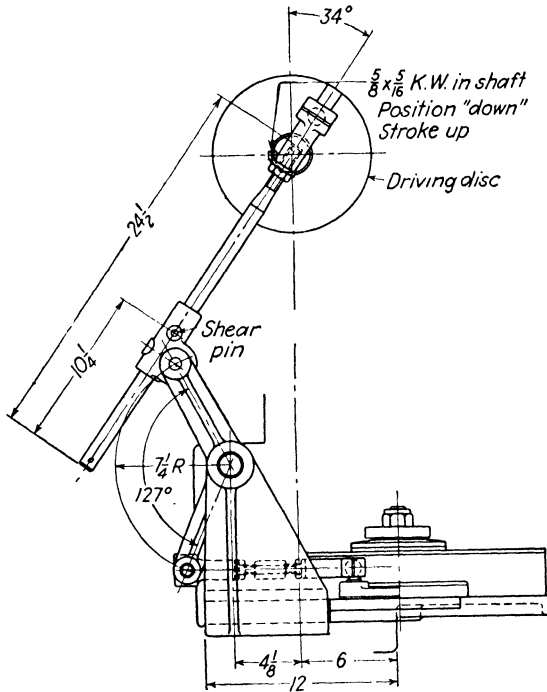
Left-hand projection of the lower view shown in Fig. 134A.
